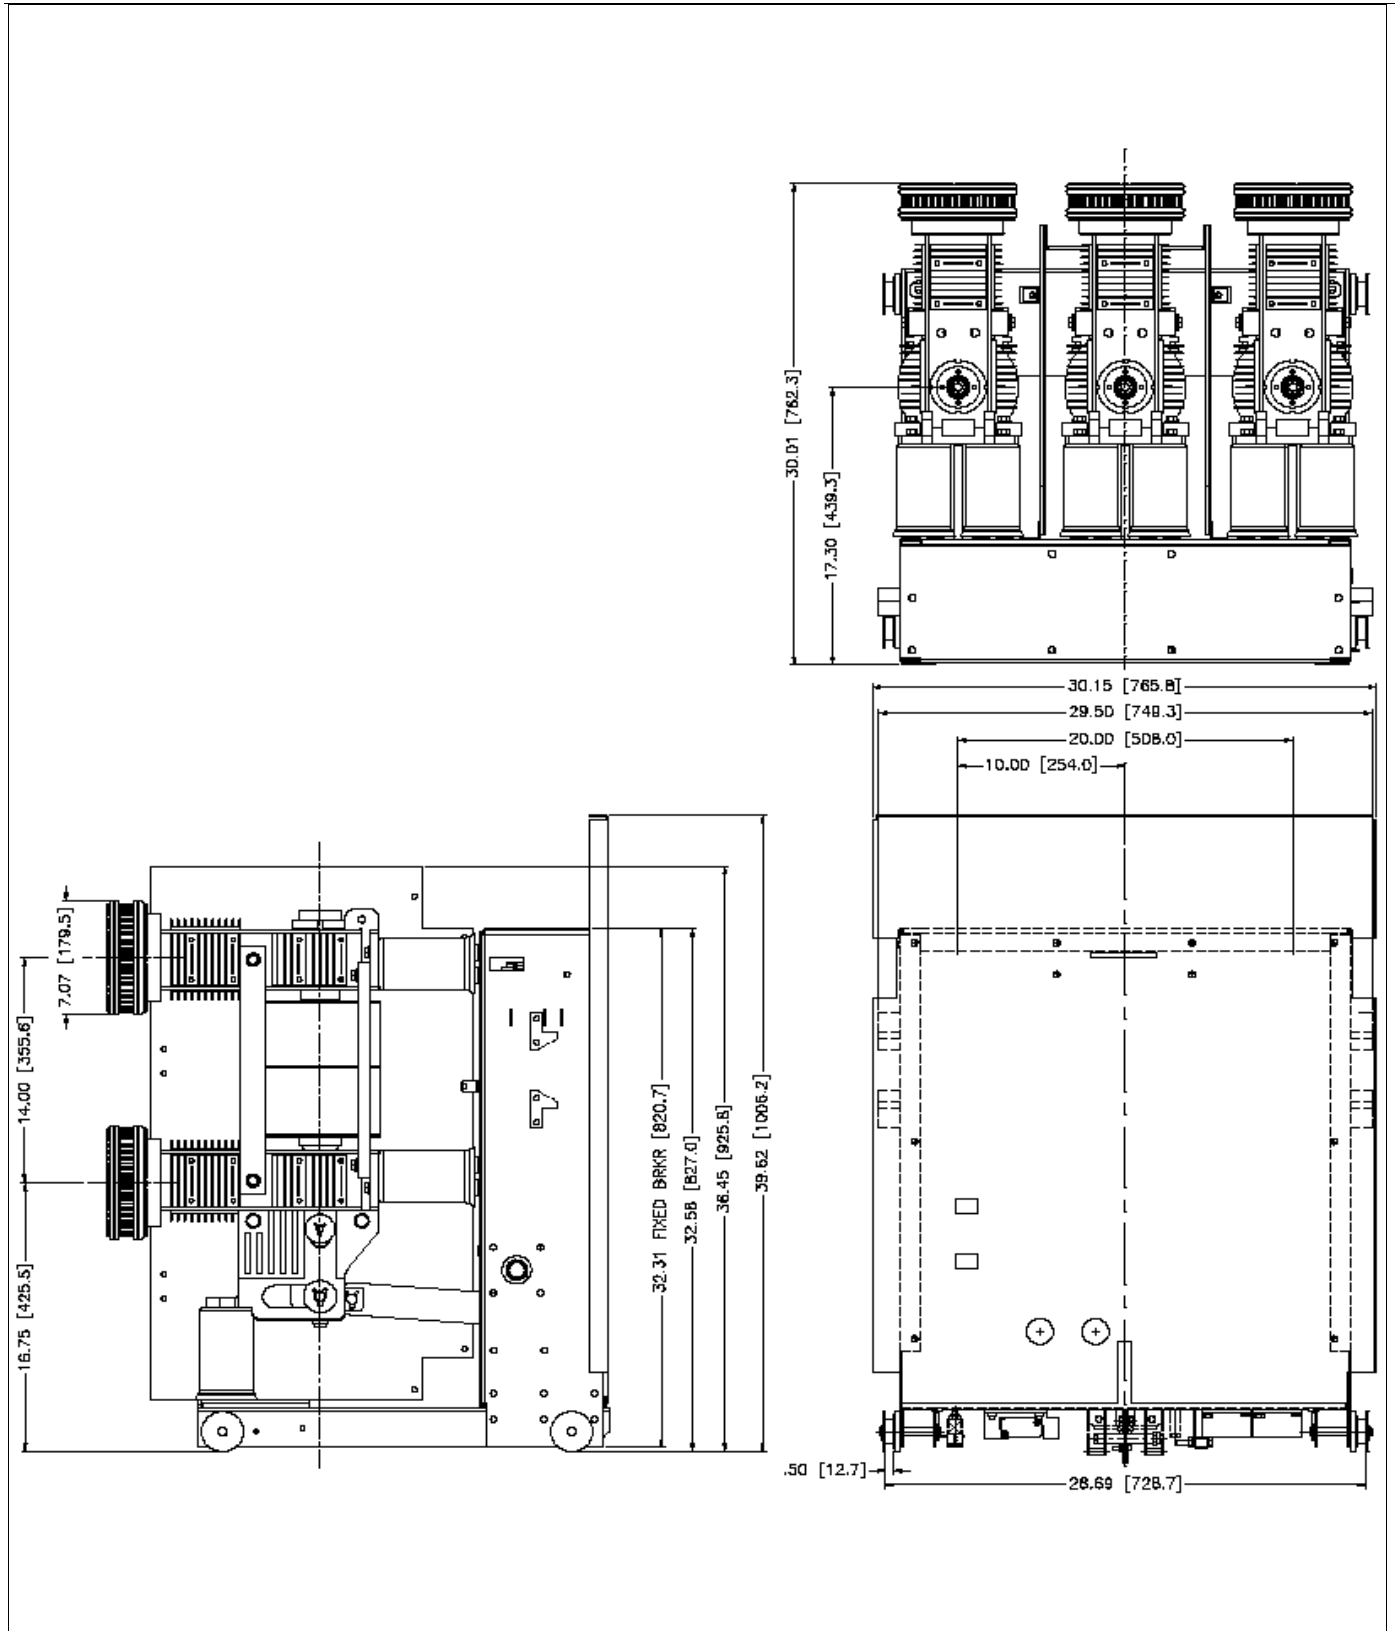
VCP-WRG Fixed Breaker Element Outlines and Dimensions in inches [mm]
